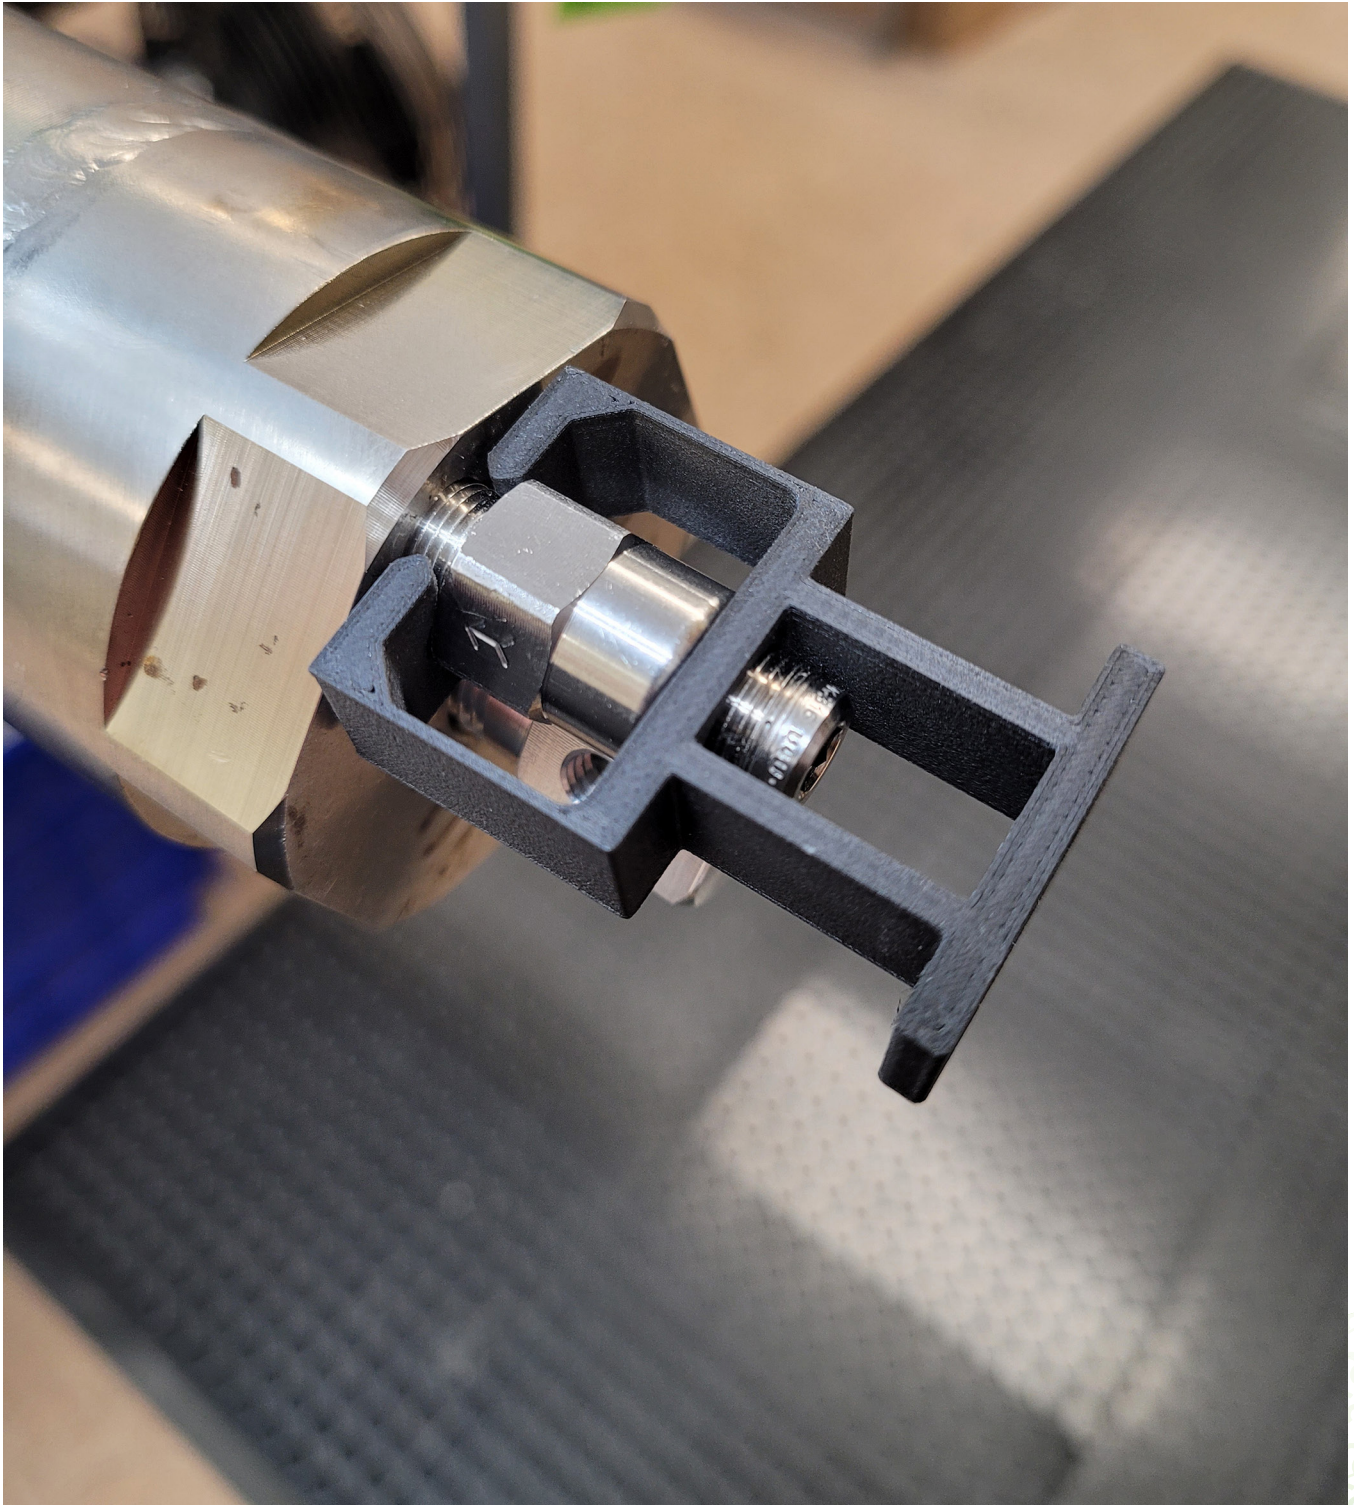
THOR disposable check valve plug clip used to position the plug to be threaded into the check valve, one of the first 3D printed tools slated to be used in-cell
